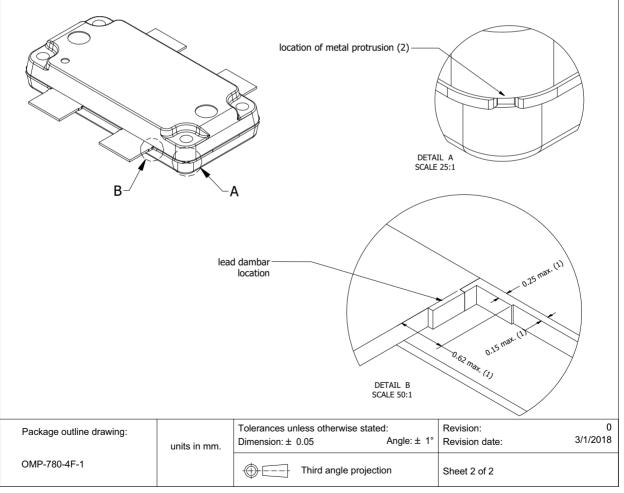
Package outline OMP-780-4F-1 (sheet 2 of 2)
